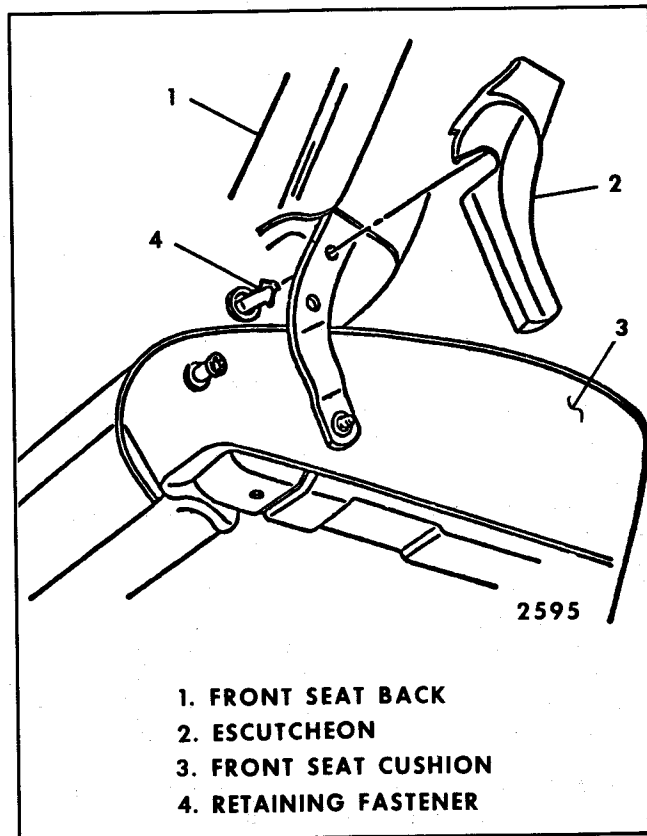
Front Seat Back Inner Hinge Arm Escutcheon Assembly
